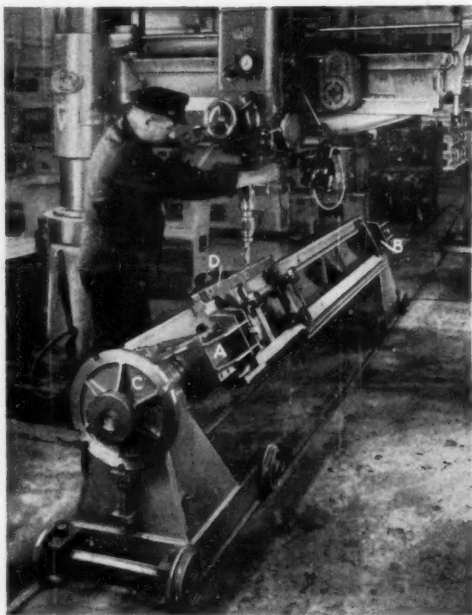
Set-up on a Raboma Radial Machine for Carrying Out a Series of Drilling Operations on a Lathe Bed
